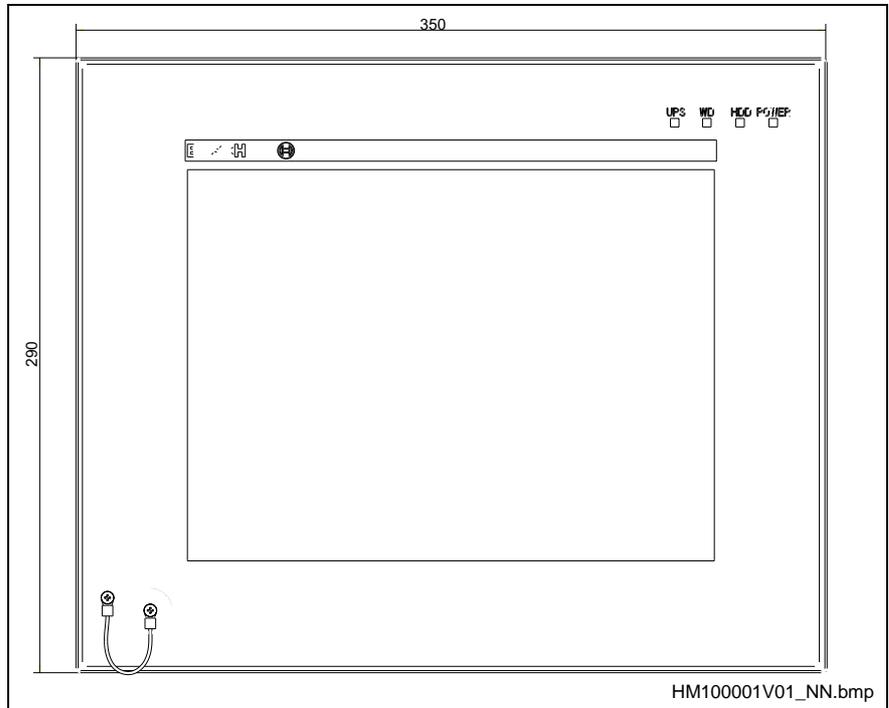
Dimensions – front panel BTV 16.2BB
